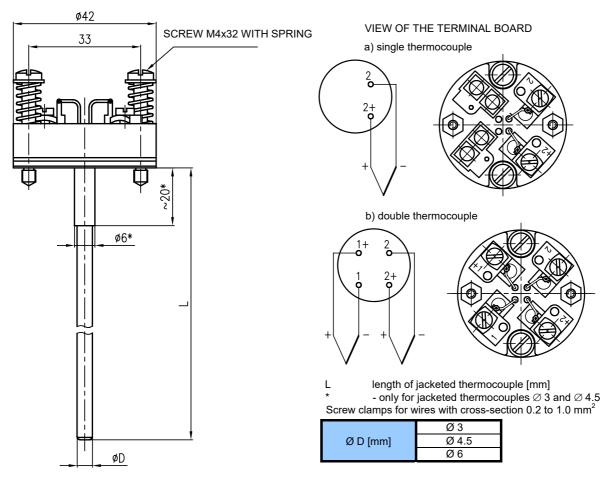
DIMENSIONAL DRAWING - DESIGN F
